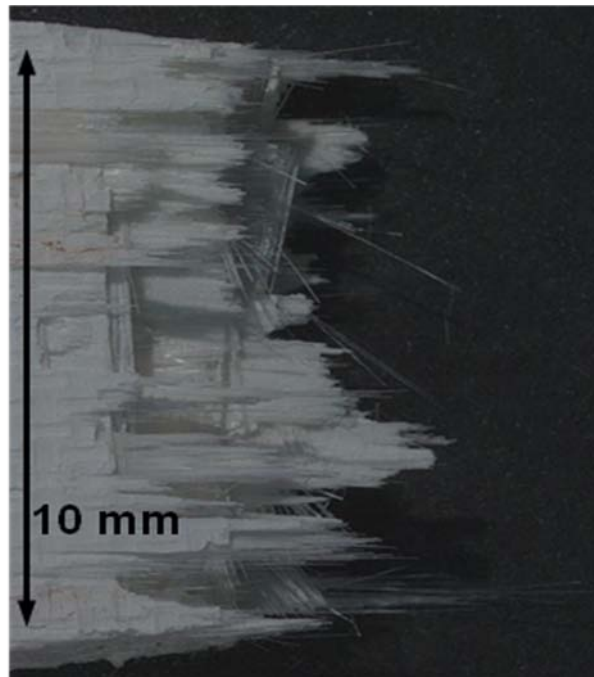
Fracture surface of the N720/AM specimen tested in tension to failure at 1100°C in laboratory air.
